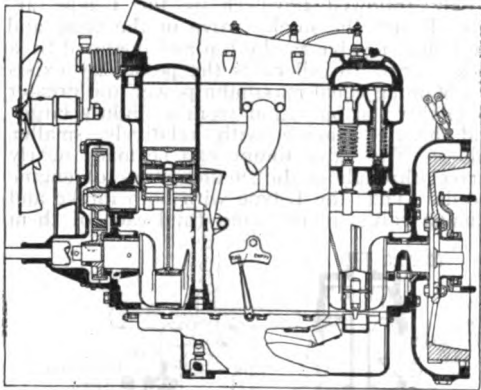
Four-cylinder, L-type engine, block-cast.
